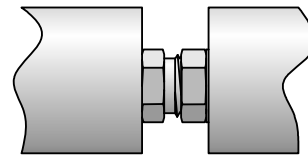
F50HAO for close coupling of components with two SAE Straight thread ports
